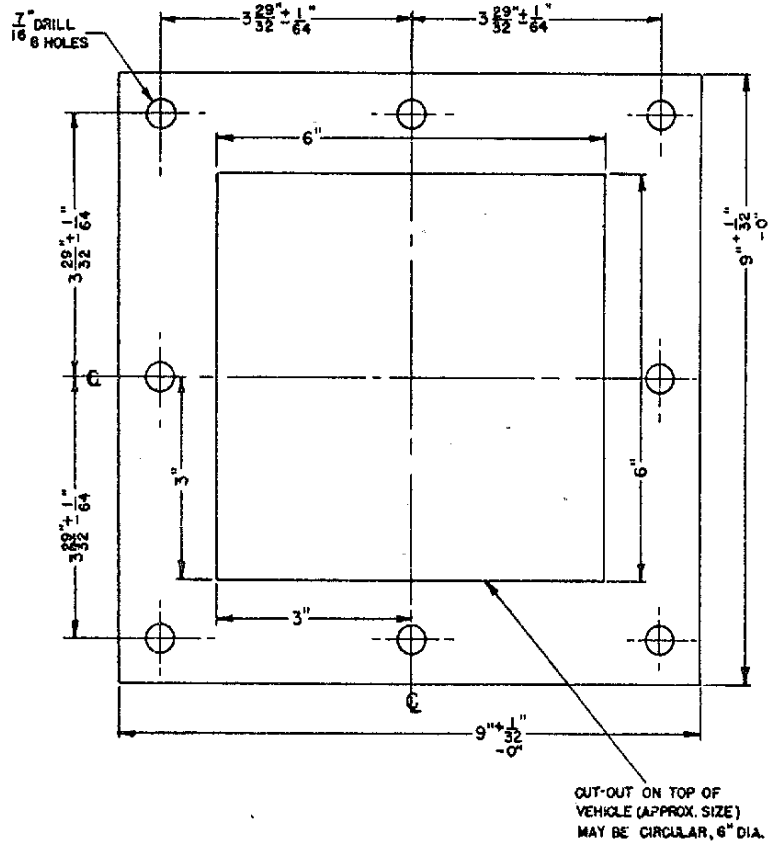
Positions of Aerial Base C2 Mounting Holes.
